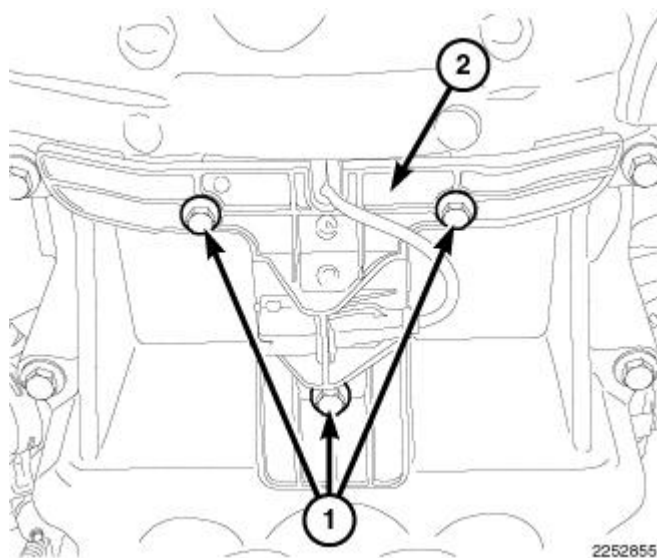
Crankshaft Position Sensor (CKP) Access Cover
